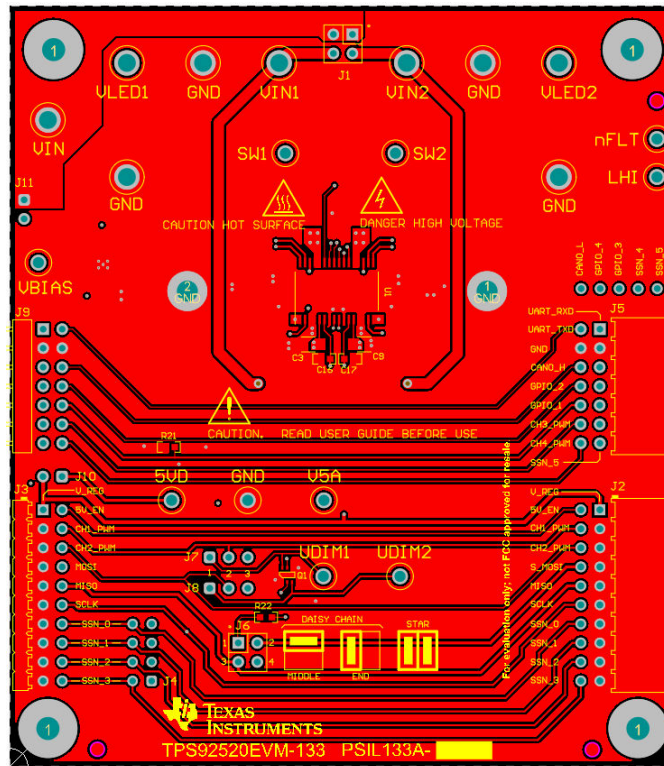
TPS92520EVM-133 Top Layer and Top Overlay (Top View)
